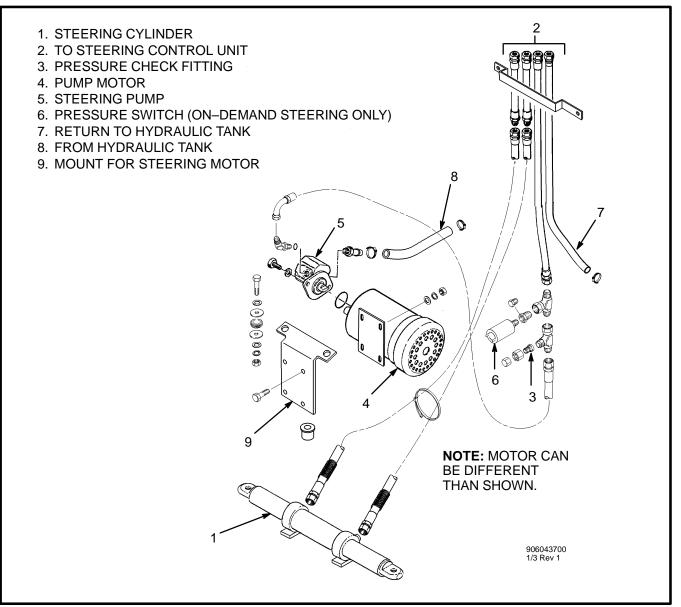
E1.50-2.00XM (E25-40XM) STEERING PUMP AND HYDRAULIC CIRCUIT
